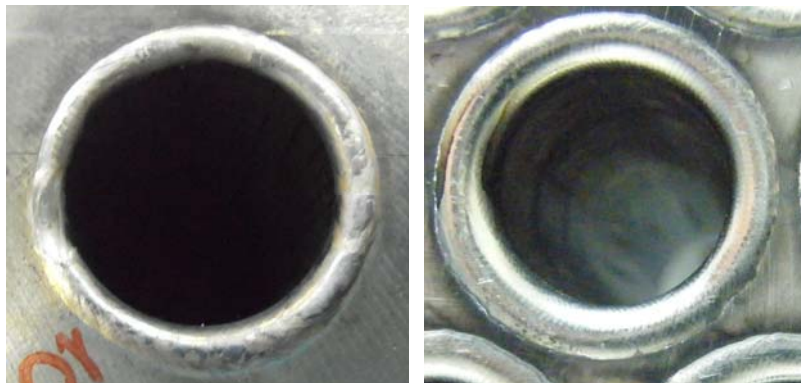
Photograph of Nickel samples welded by LASER (left) and TIG (right)
